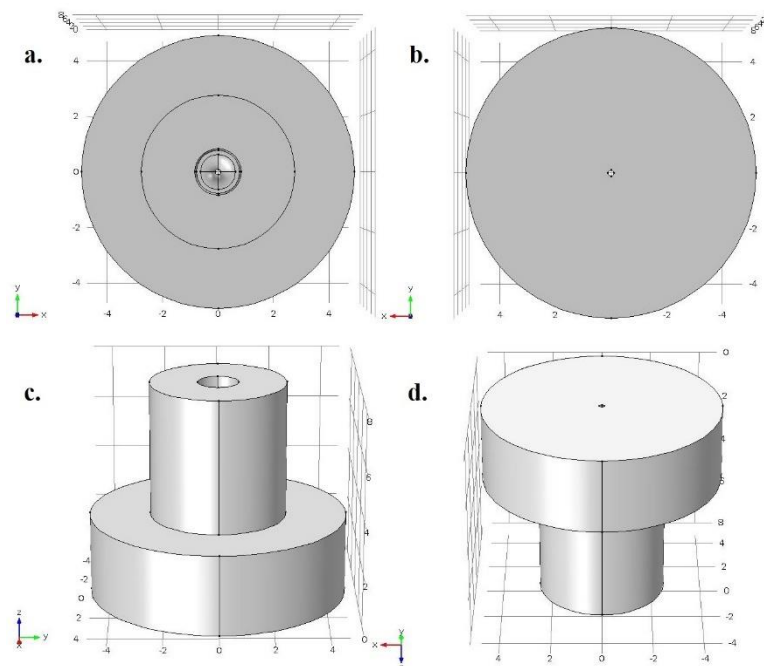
Schematic illustrations of top and bottom view of piston lower end type 1, (a. top view, b. bottom view, c. top inclined view, d. bottom inclined view)
